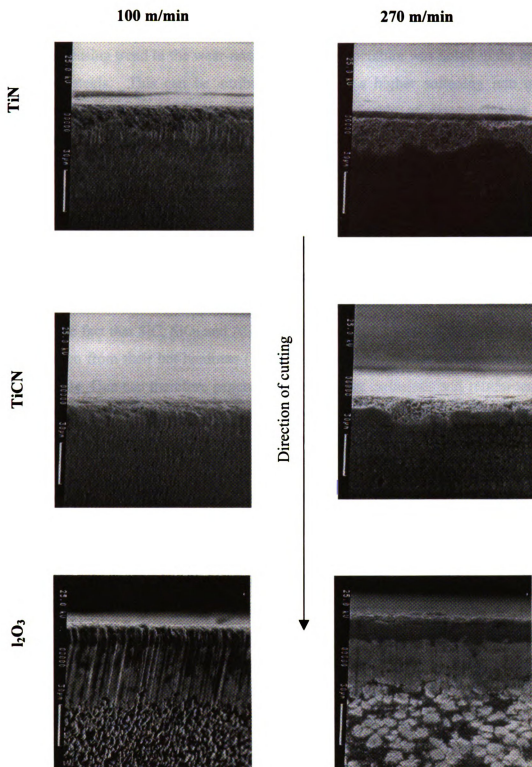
SEM micrographs (800 $\times$) of the worn flank surfaces of the coated cutting tools after machining spherodized AISI 1045 steel for low and high cutting speeds.
